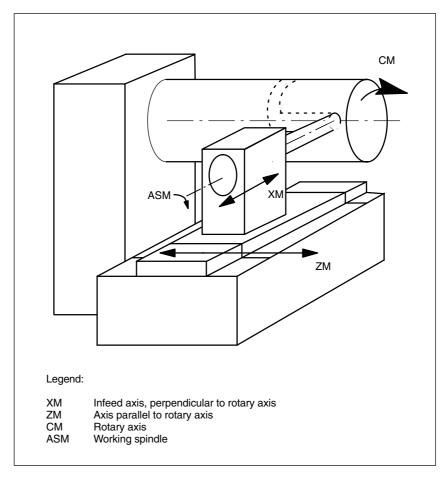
Machining grooves on generated cylinder surface with X-C-Z kinematics
